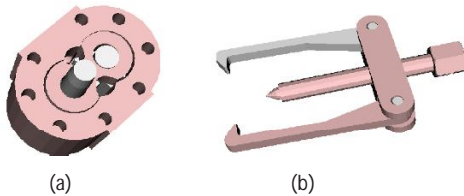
Assembly tasks: a) Pump b) Bearing Puller
